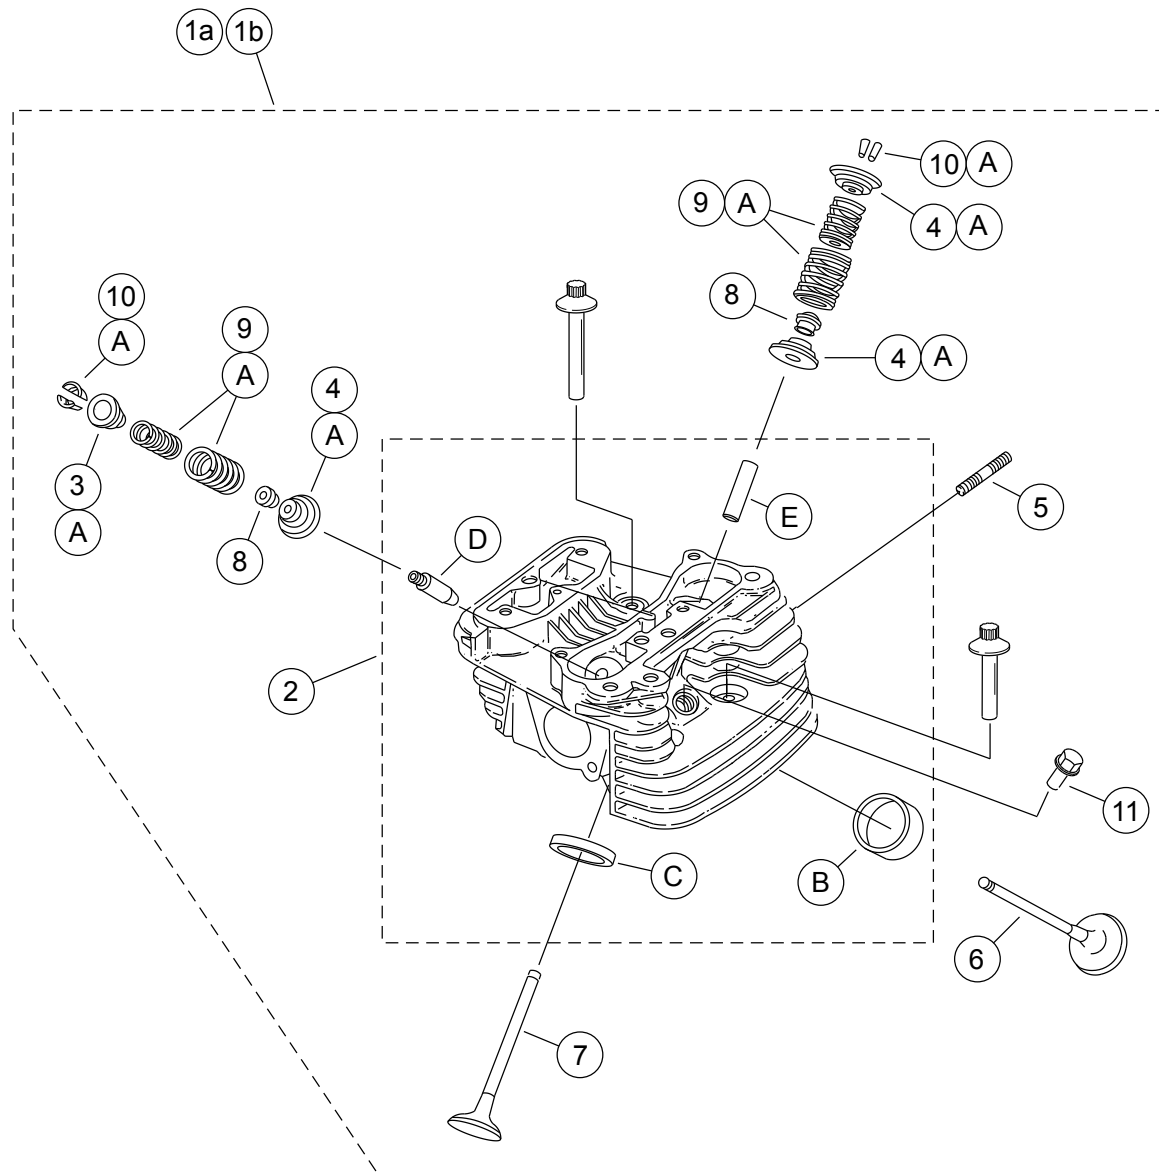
Service Parts: SE Pro Twin Cam 103 (1690 CC) Cylinder Head Kits
